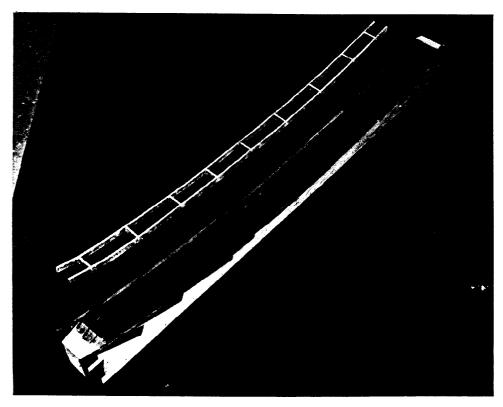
Fiberglass/epoxy reinforcement ladder and boxed pattern.
